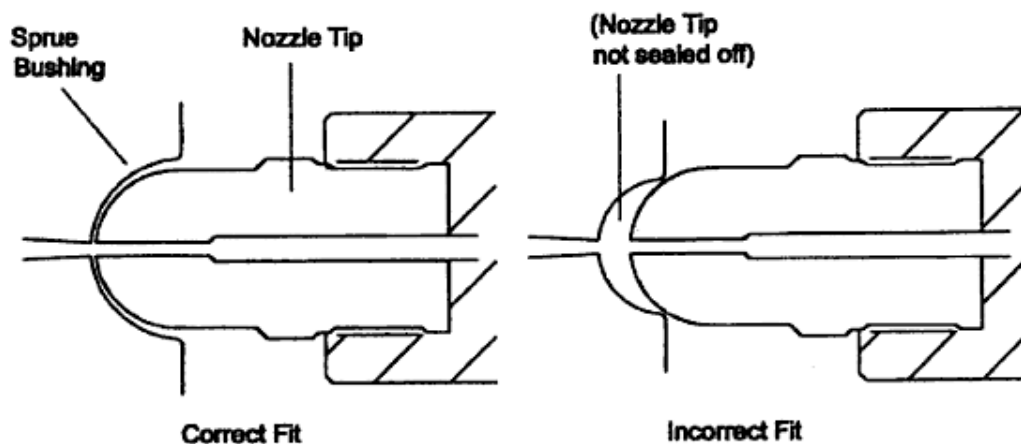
Illustration of the fit of a nozzle tip to the sprue bushing [9].
